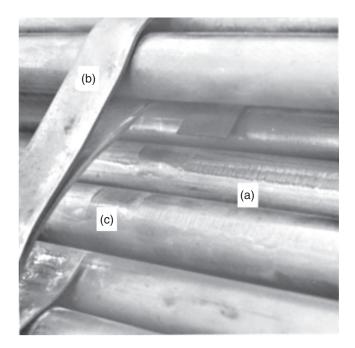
Fretting Wear in the Inlet Region of a Liquid Process Heat Exchanger: a) Tube-to-Tube Initial Damage, b) Lacing Strip, and c) Damage at Lacing Strip Location (Pettigrew, 1976).
